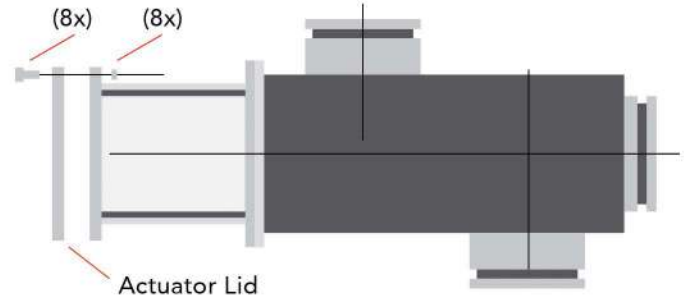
REMOVE ACTUATOR HOUSING BOLTS
